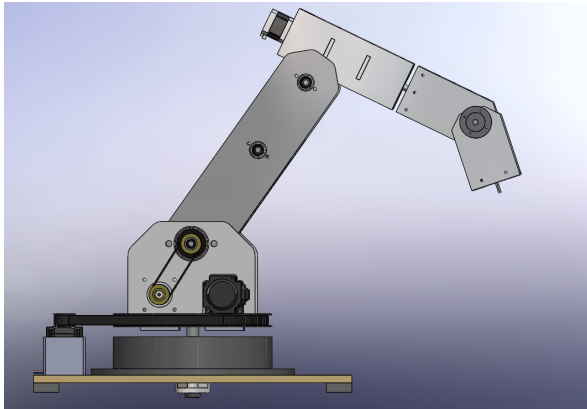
shows the early full-assembly CAD models used to block out the arm's joint envelopes, motor placement, and belt/pulley transmissions before any physical fabrication began.
